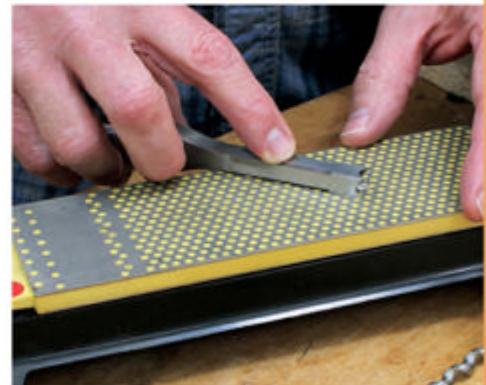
Remove any burrs at the cutting edges, and hone the flat outer faces smooth, with a sharpening stone.
